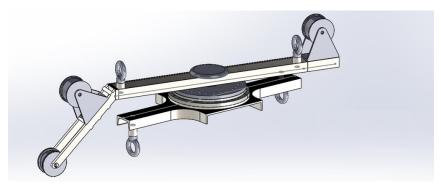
CAD Drawing of the Two Points of Lift Concept
